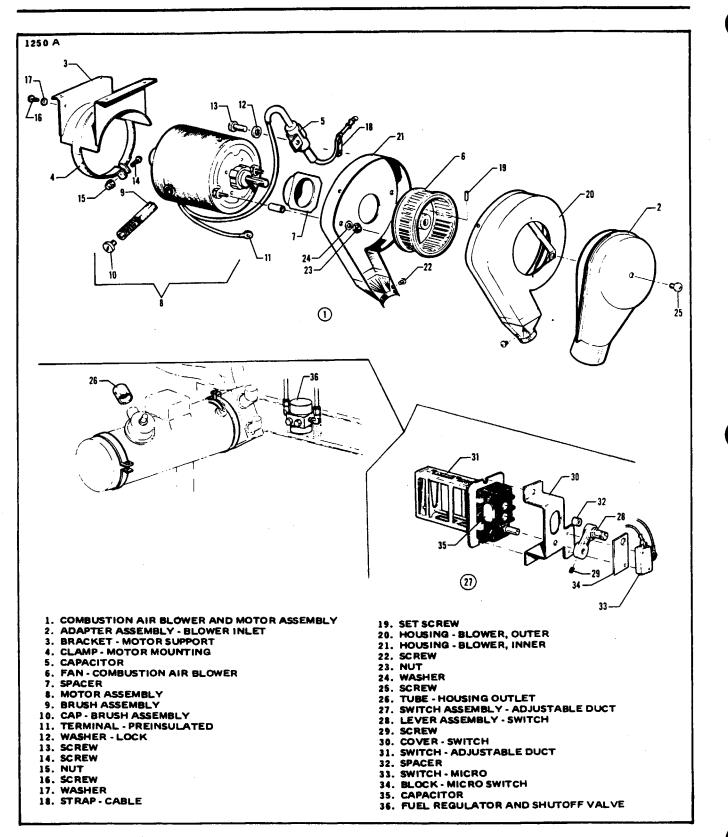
Combustion Air Blower and Motor Assembly 89D26-1
